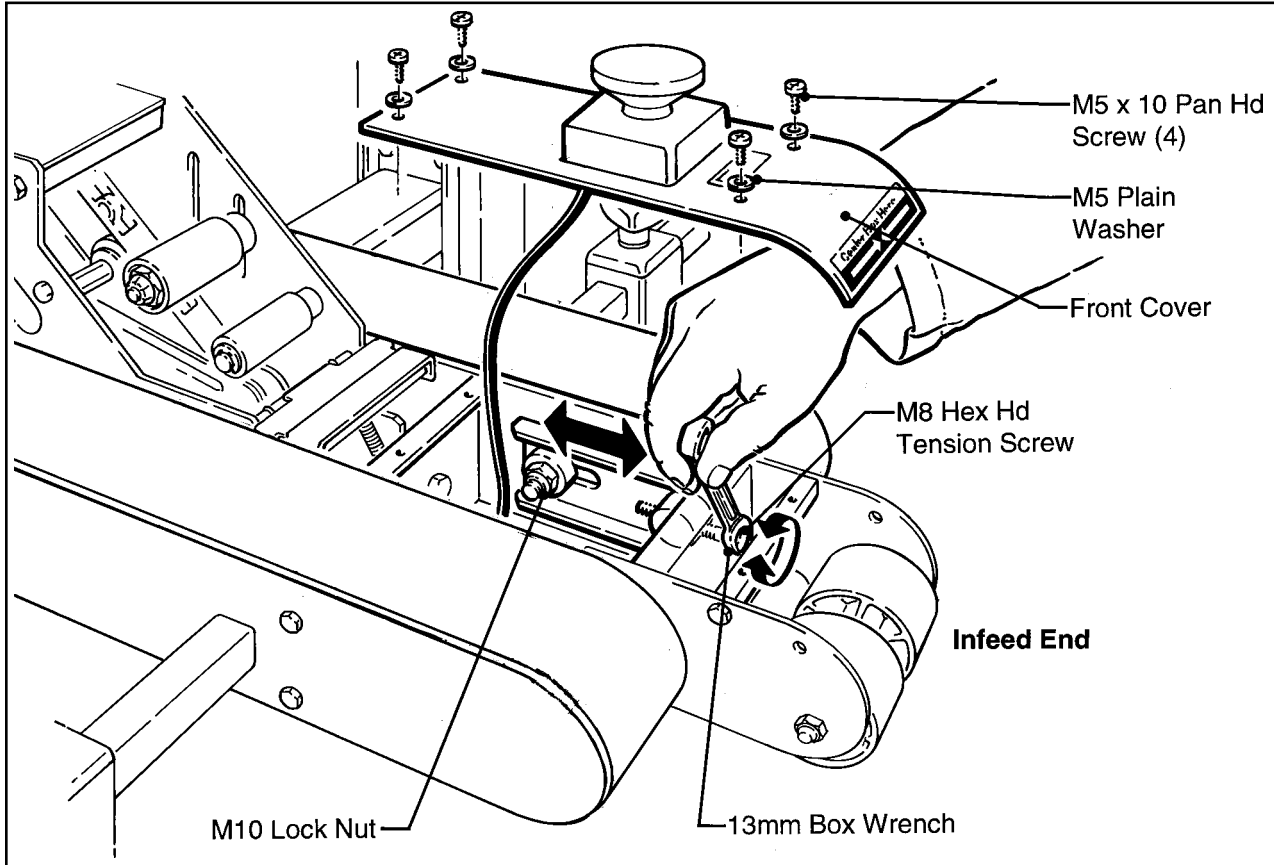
Box Drive Belt Tension Adjustment, Upper Belts (Infeed End)
